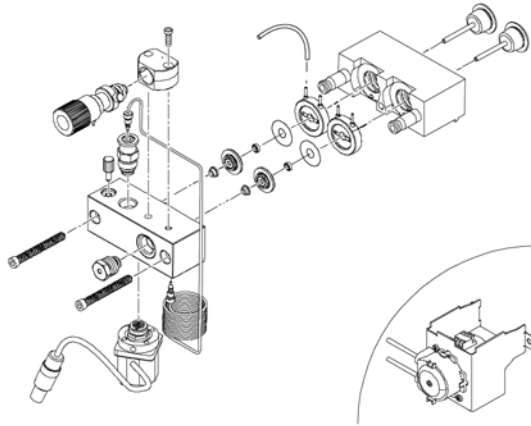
Exploded Diagram of the Pump Head with Seal Wash
